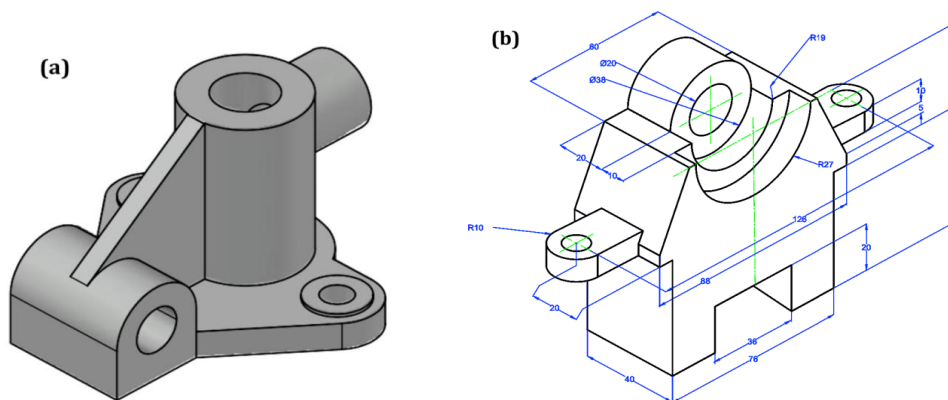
(a) A 3-D drawing assignment (b) Personal attempt on an Isometric drawing assignment
